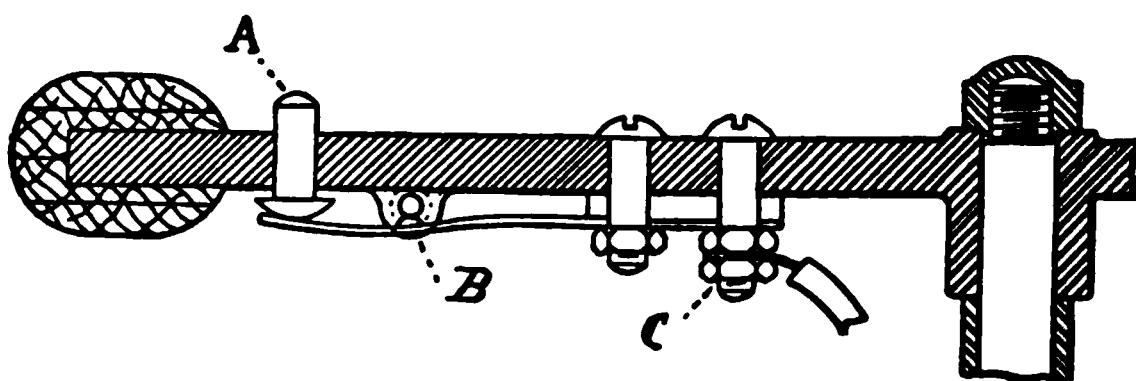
The Searchmont Steering Wheel with Electric Circuit Breaker. One terminal is at C, the other at pin, B. By depressing button, A, contact may be broken. By withdrawing pin, B, circuit may be interrupted, rendering it impossible to start the engine.
